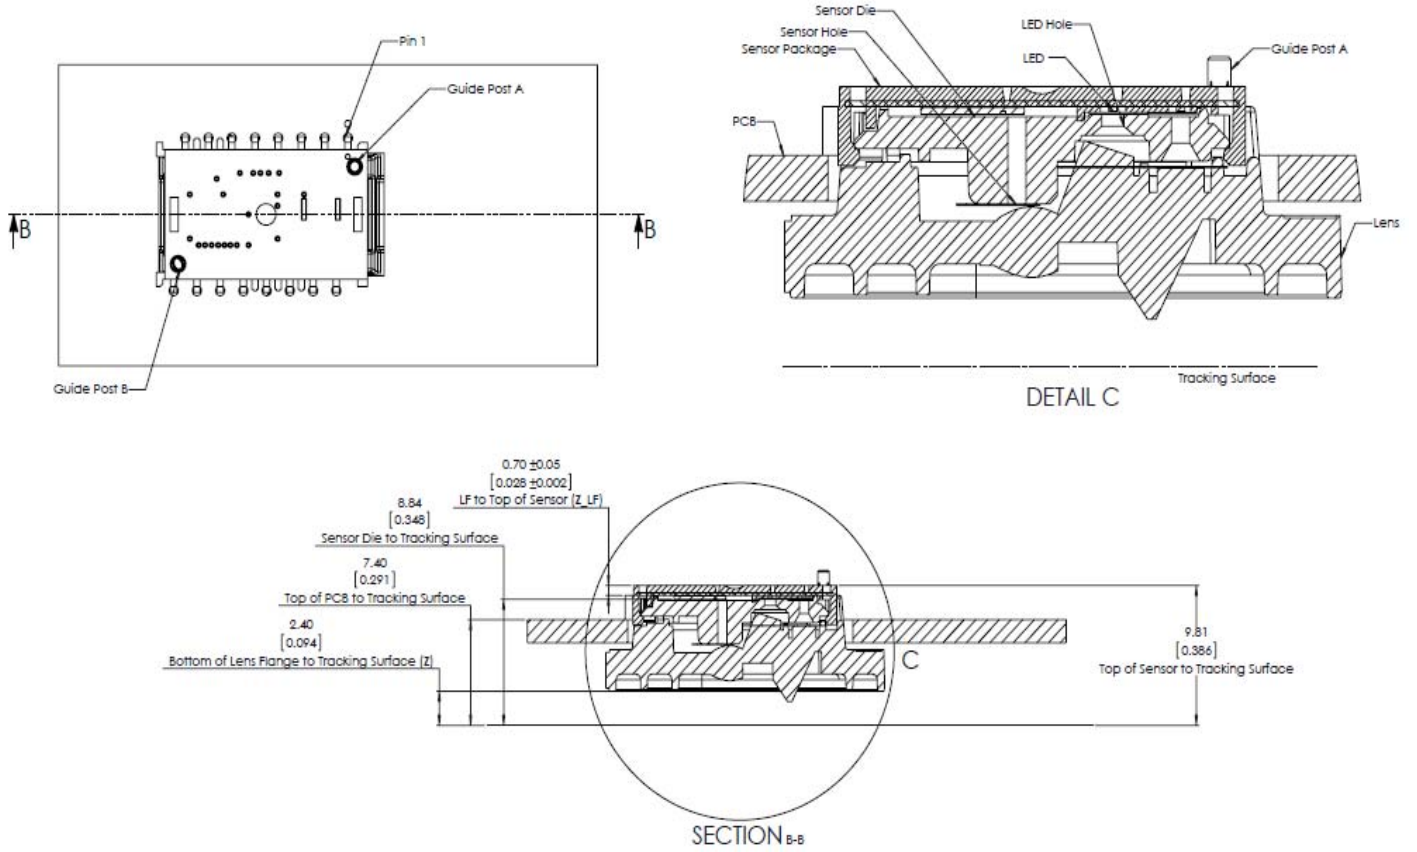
Assembly drawing of PMT9101 and distance from Lens reference plane to Tracking surface (Z)
